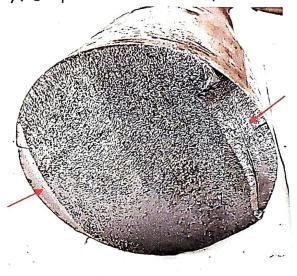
(b) showing fracture face (fatigue zone) of sample no. 153/23/2.
